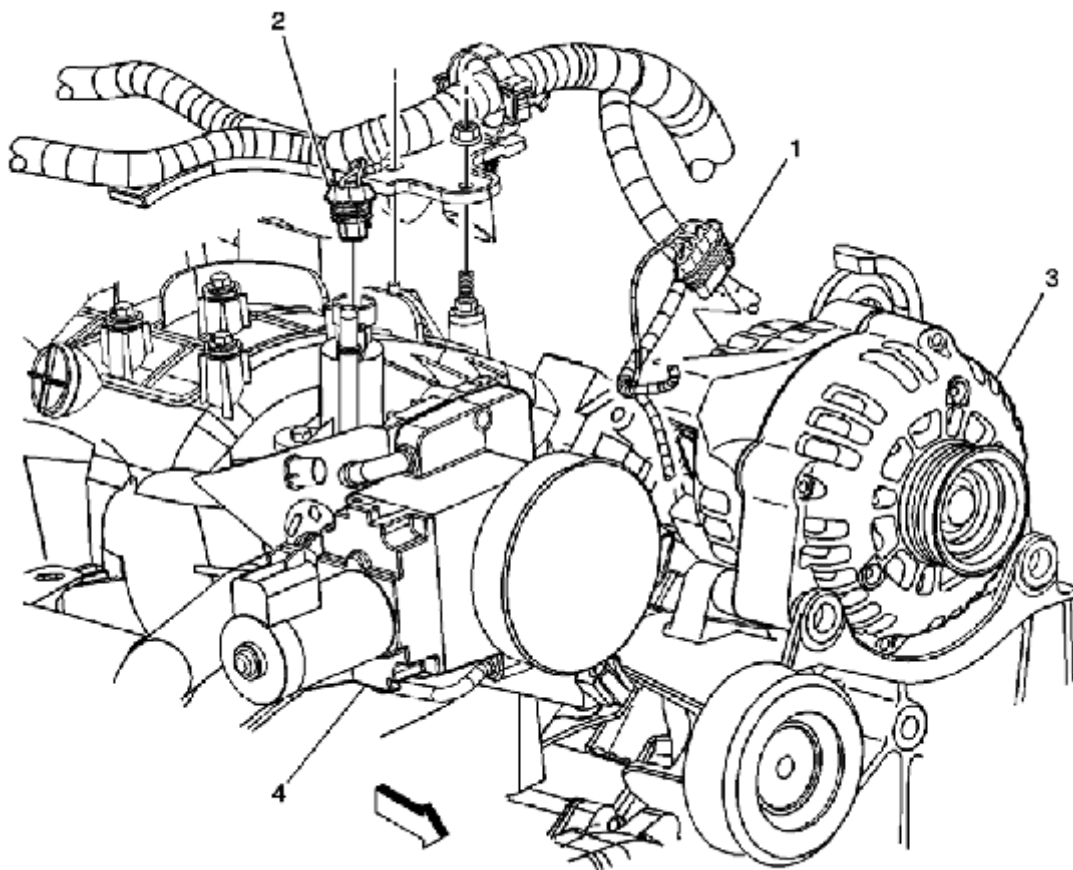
Engine Component View (4.8L, 5.3L, 6.0L) - Top Front
